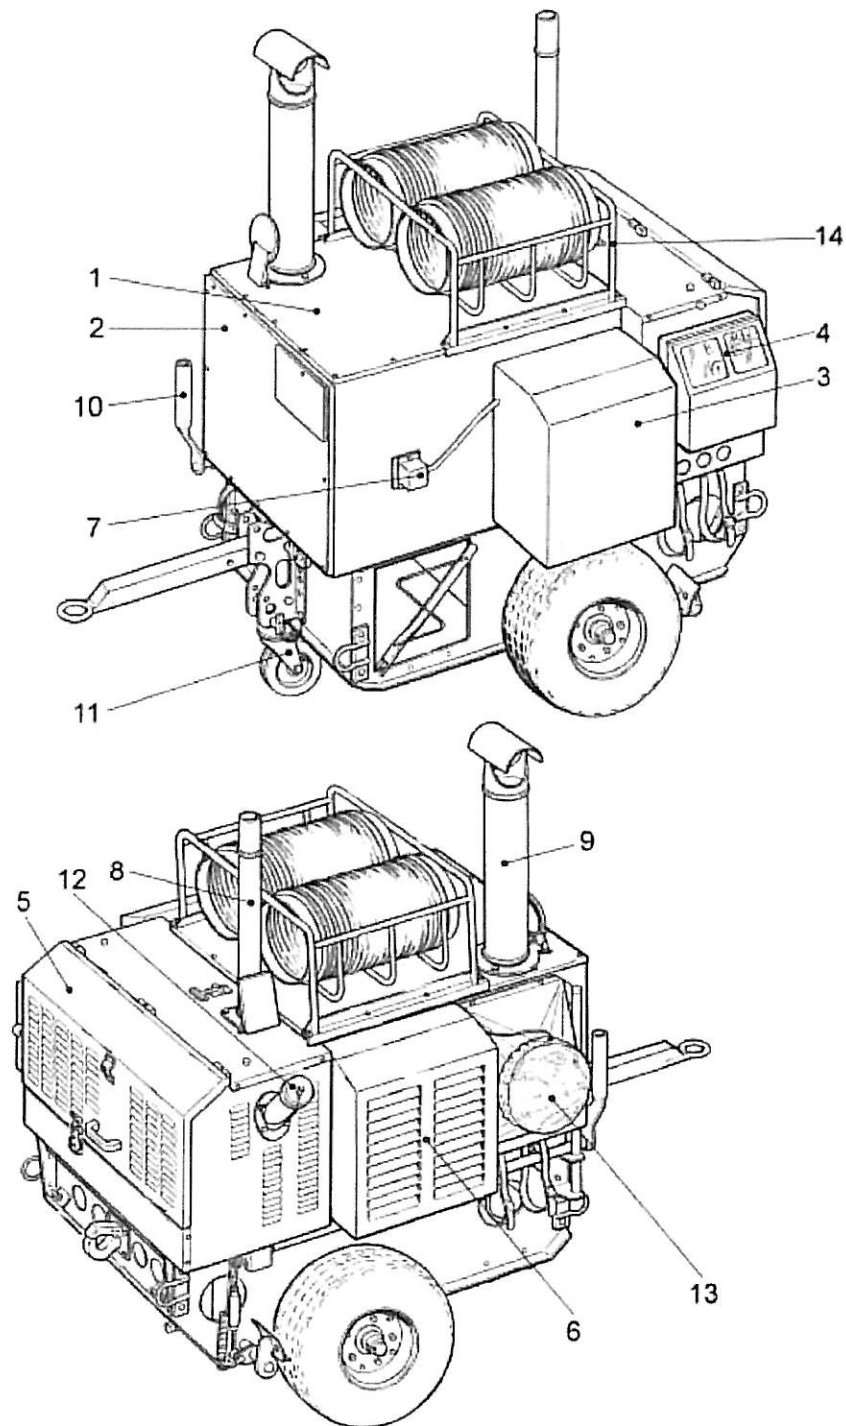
PORTABLE DIESEL HEATER VIKING 400
